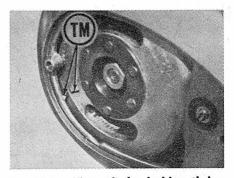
View of the ignition timing marks. The breaker points should just open when the marks align.
